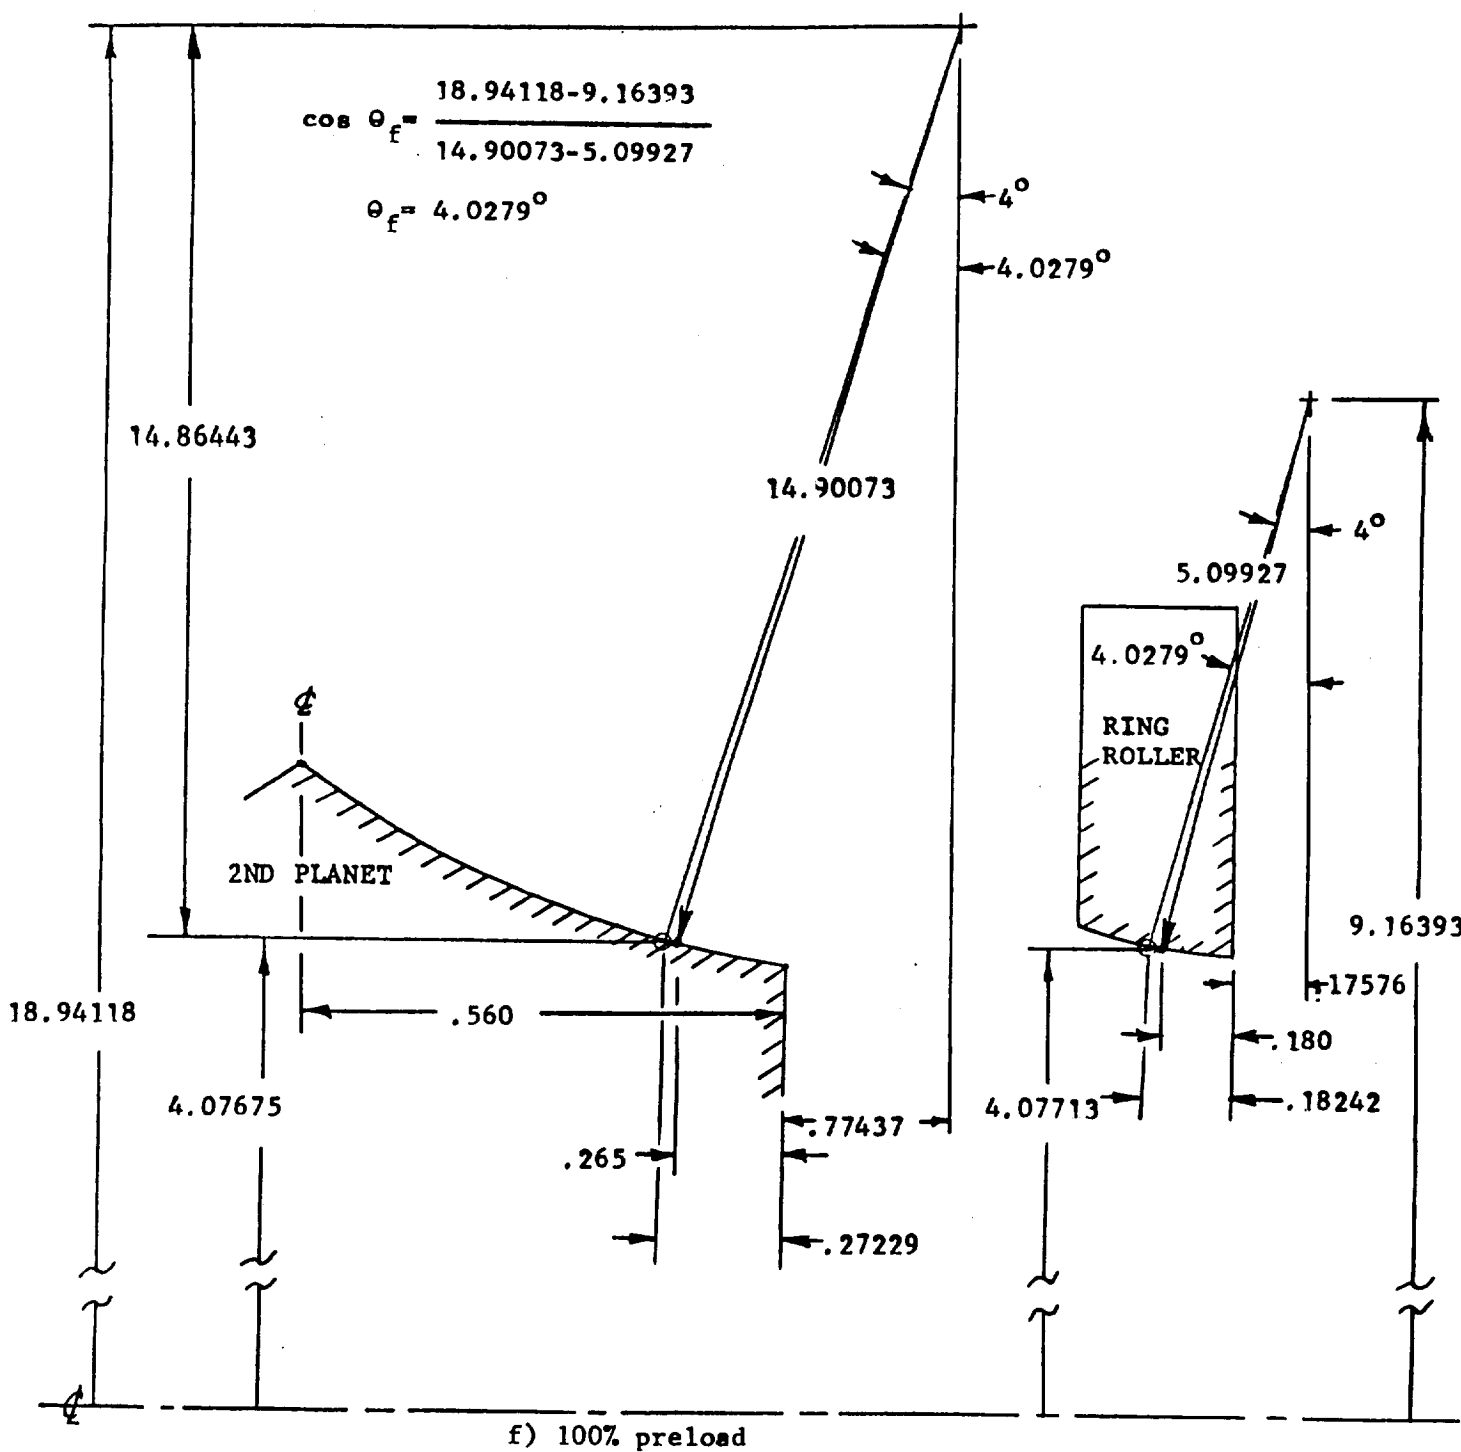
(concl.) Second planet-ring roller engagement diagram (DC-500 drive).
